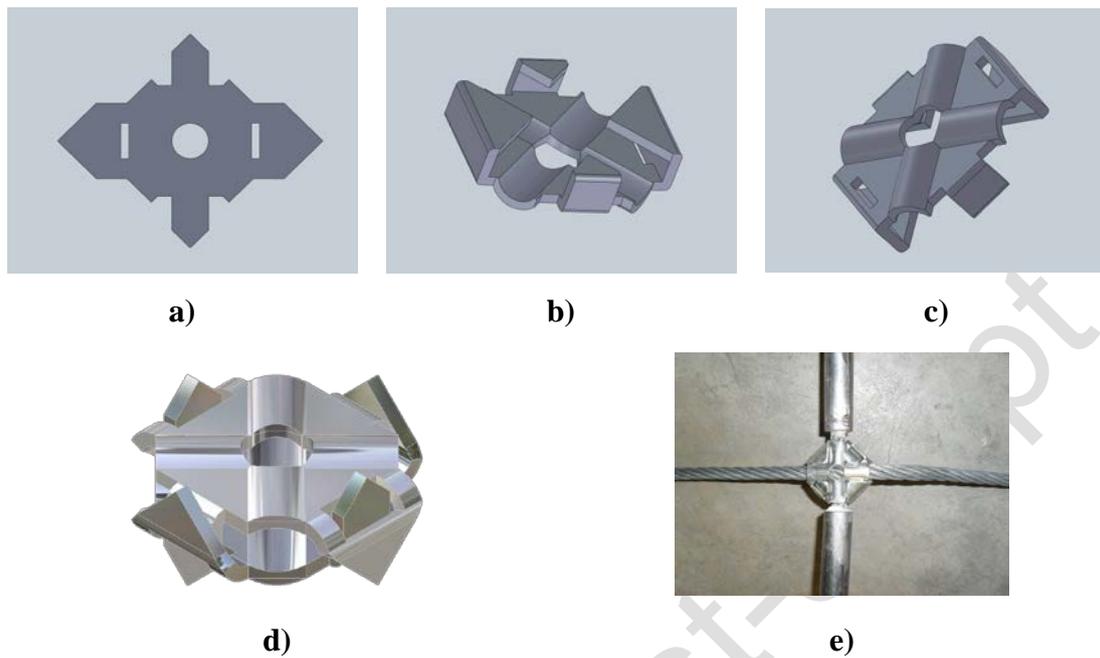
Clip details: (a) model before folding; (b) isometric lower view; (c) isometric upper view; (d) assembled clip and (e) final assembly with cables.
